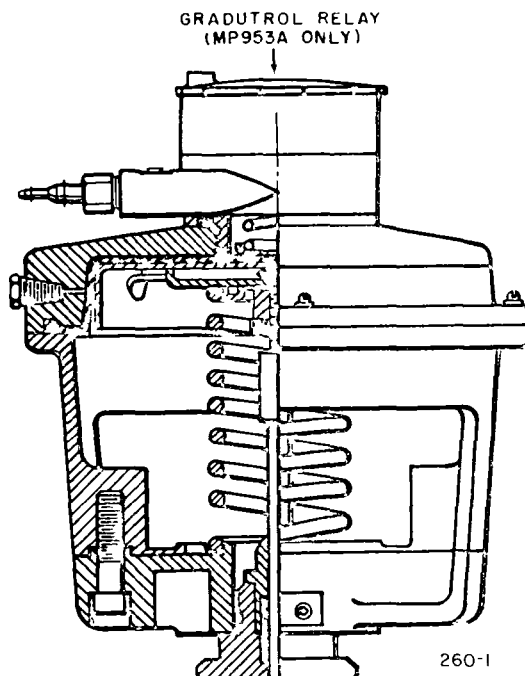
Details of MP953A or MP953C Operator Connected to Valve Stem
